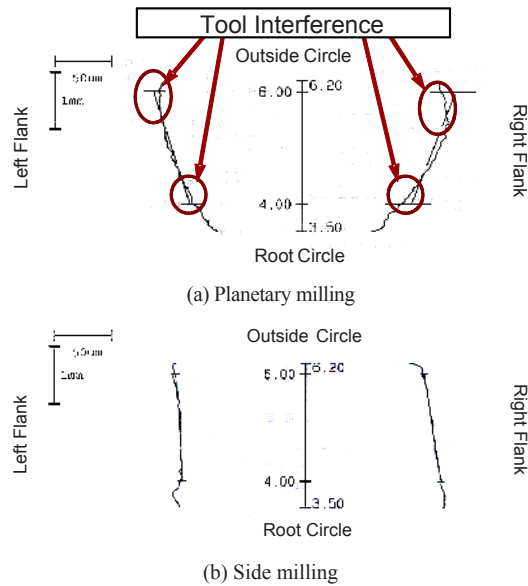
Comparison of thread profile between planetary milling and side milling.
